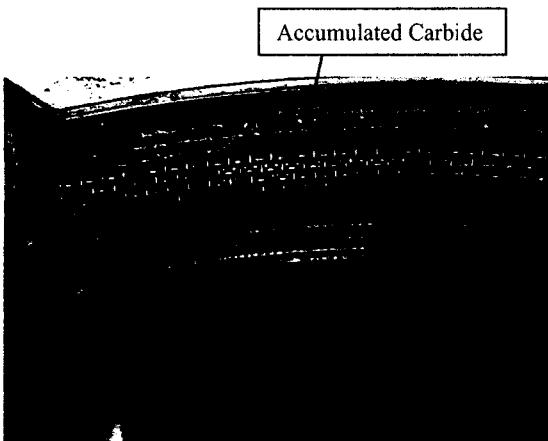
Photograph of accumulated carbide on seal tooth at a oil deflector
